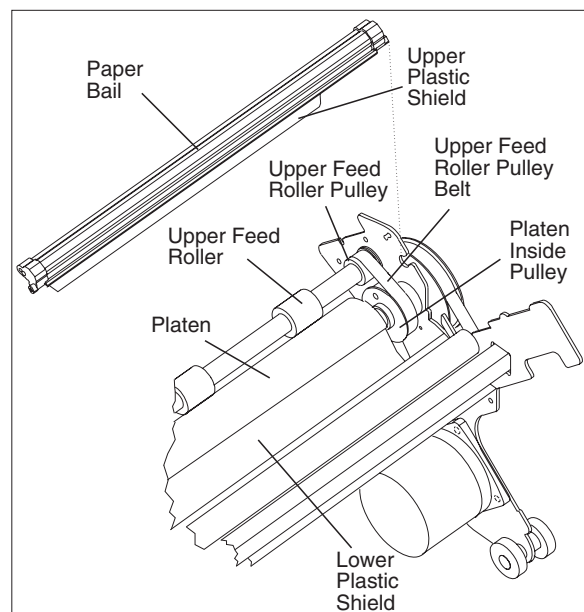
Paper Feed Main Drive. (Viewed From Top)
